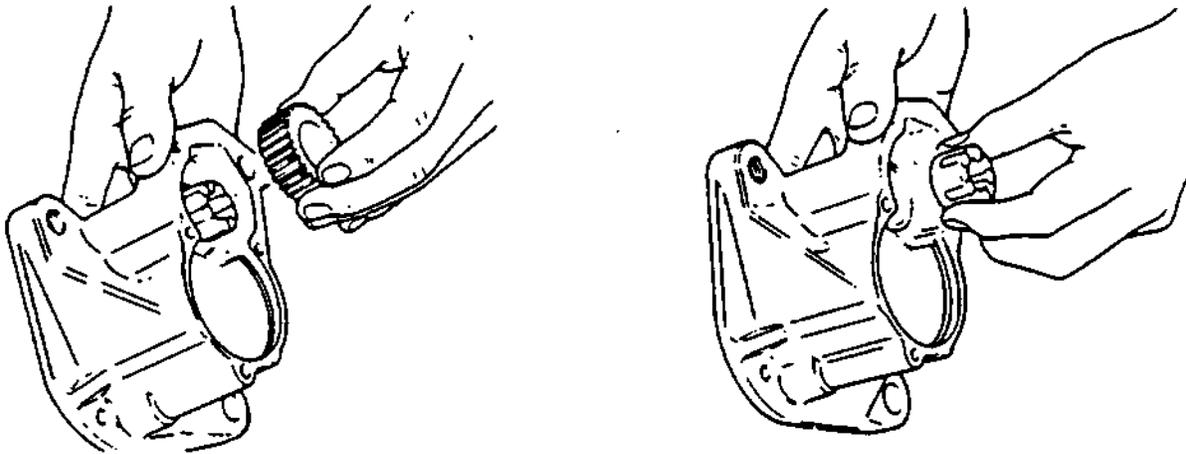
Removing Pinion, Retainer, and Rollers (Typical)
